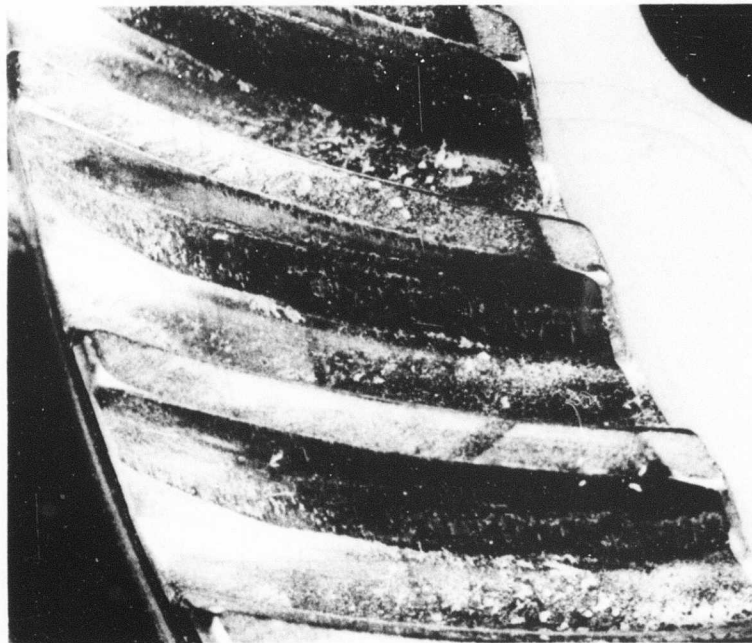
Pinion Assembly After Polyimide Retainer and Idler Gear Operation, Series 4.
